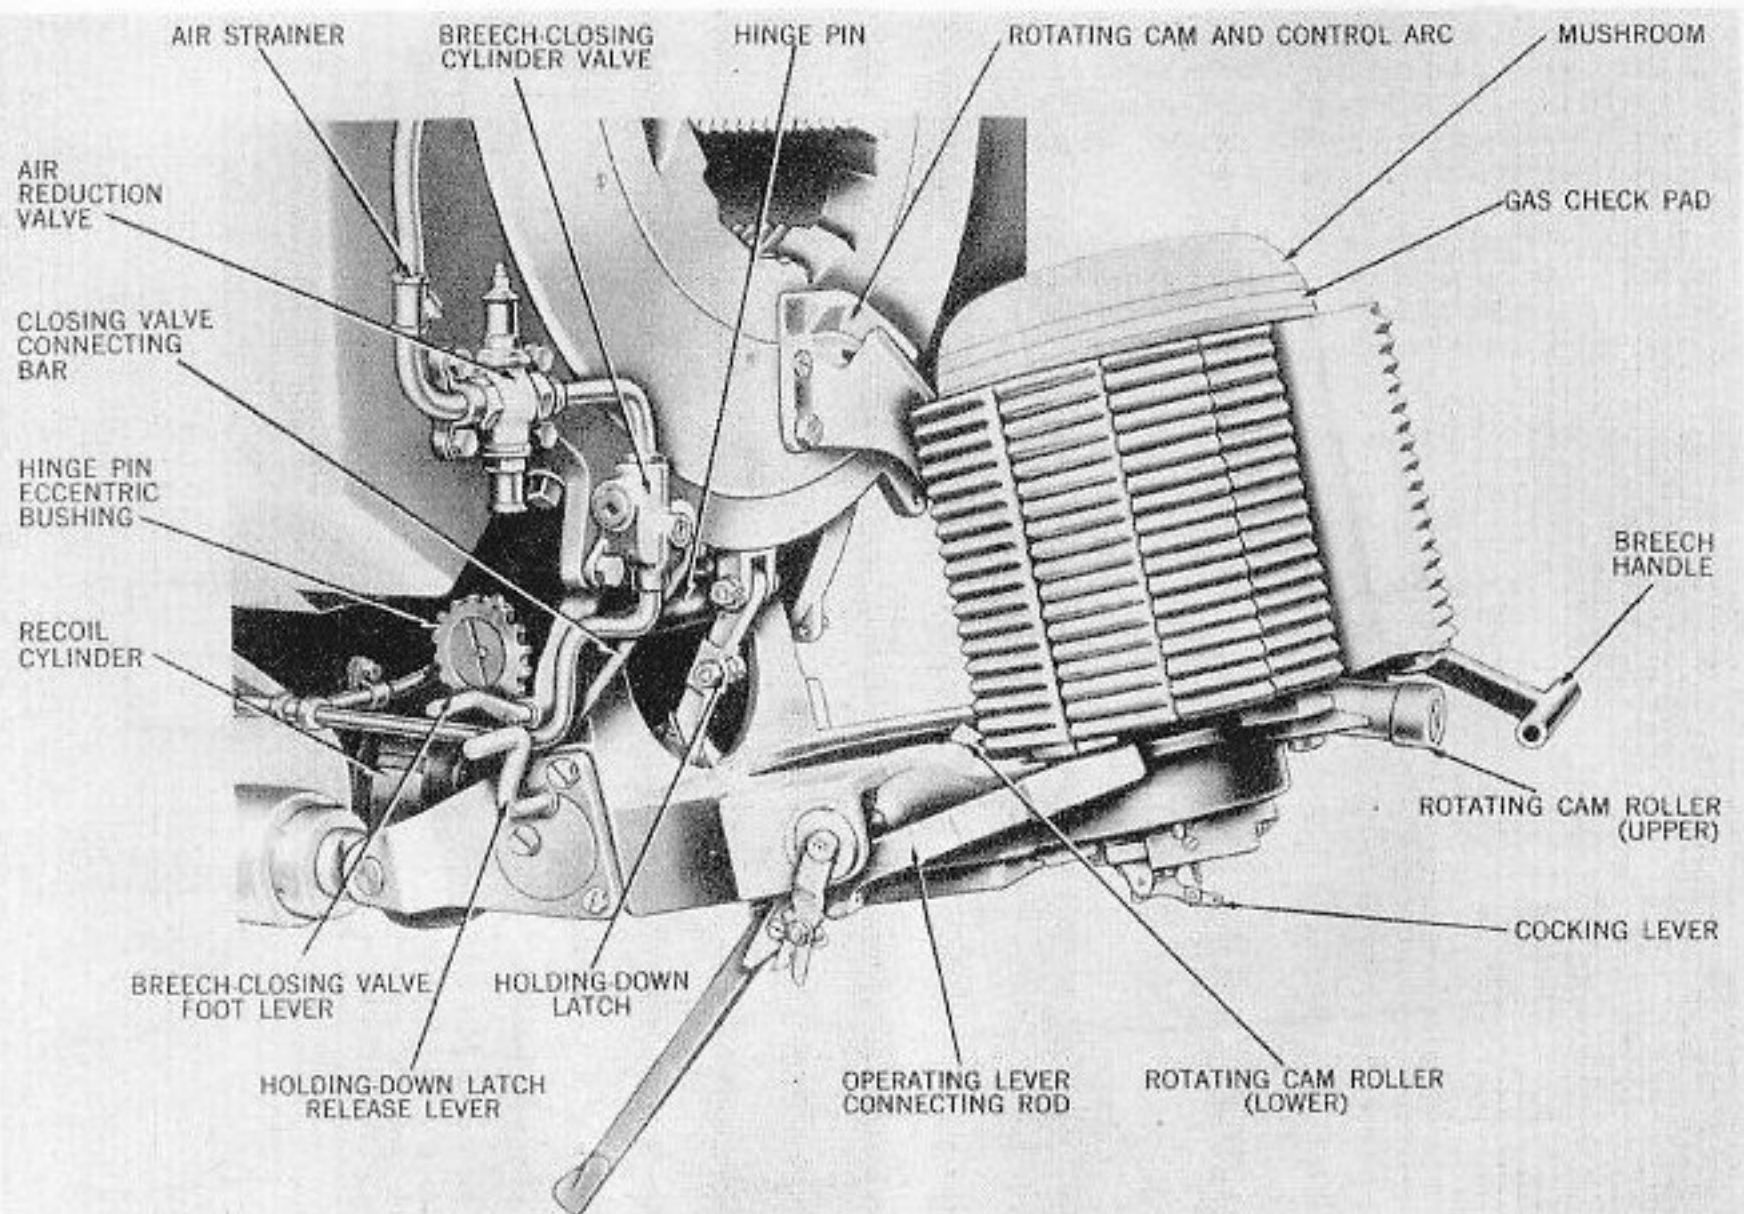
16-inch Breech Mechanism Mk 4 Mod 0 - Breech Open Showing Holding-down Latch (Operating Lever Safety Latch Mechanism Assembly Not Shown; See Figure 3-3)
